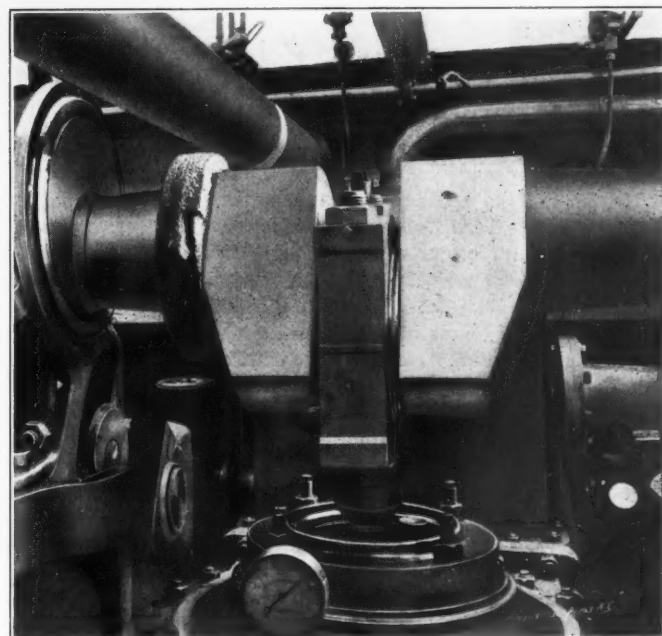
Broken Crankshaft $13\frac{3}{4}$ inches diameter Repaired by Thermit. The Ring at the left of the Crank is the Thermit Metal.
